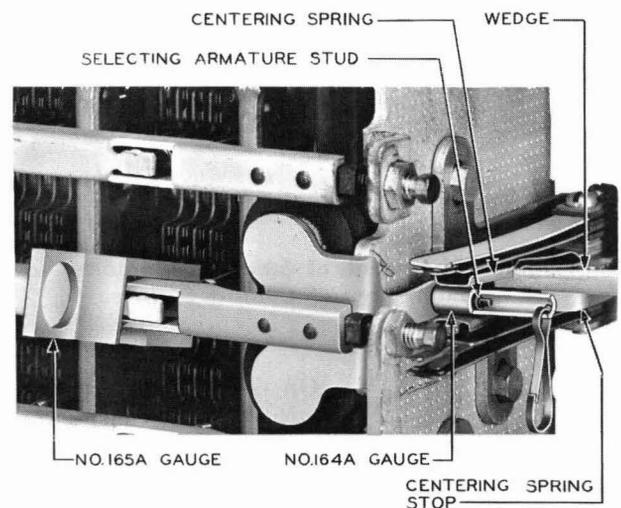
Fig. J – Method of Checking Position of Selecting Finger Using the No. 164A and No. 165A Gauges
